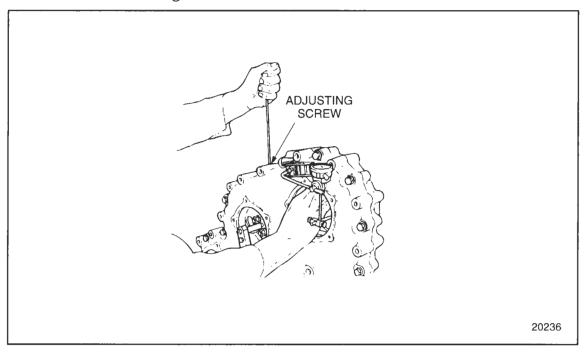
Checking Adjustable Idler Gear-to-Camshaft Drive Gear Lash
